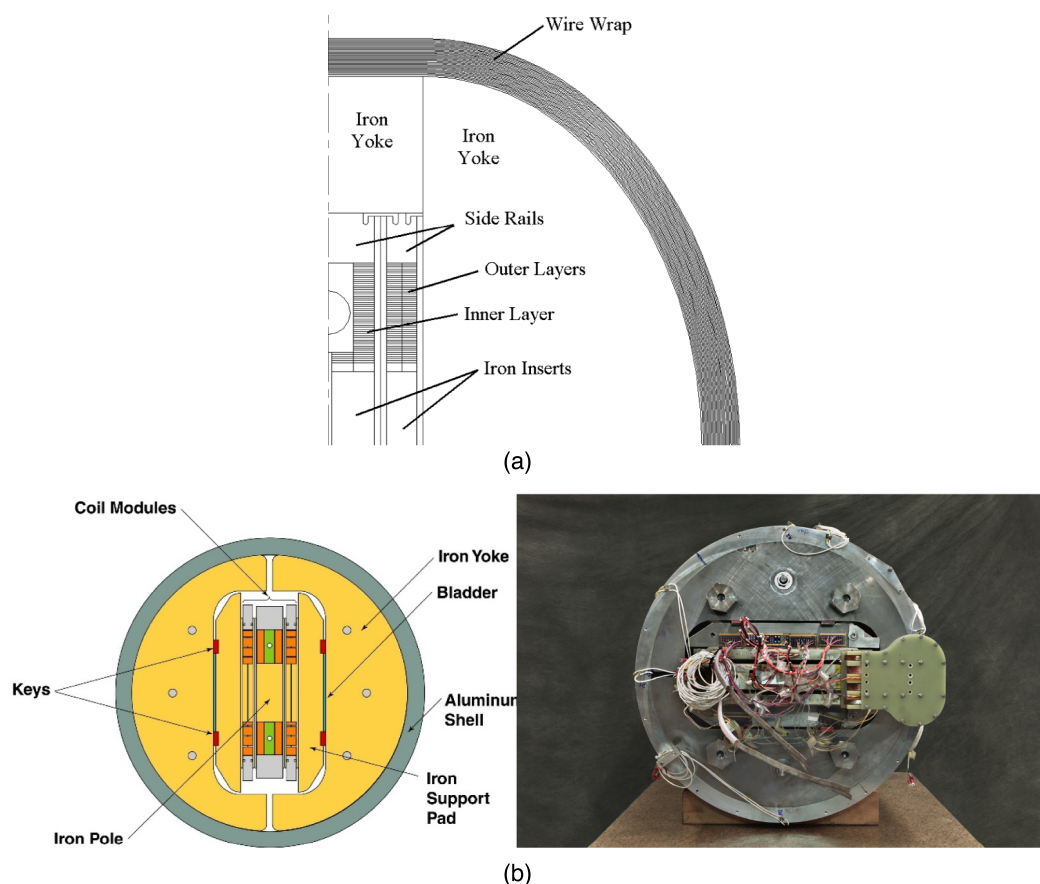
(a) Original design of RD-3 using a wire wrap support structure technique and (b) cross section of the final design of RD-3 based on the key and bladder concept with a 10 mm bore and the completed magnet.
